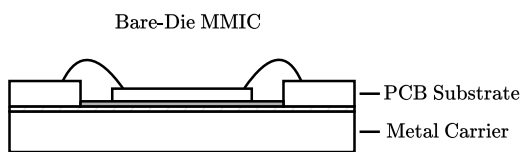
Cross-sectional view of MMIC integrated within laser-cut PCB cavity
